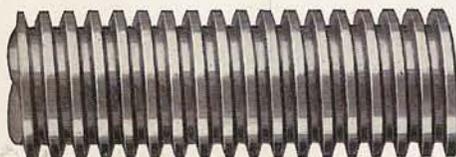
Section of Lead Screw—Actual Diameter Used on the 9-inch Lathe. It is Guaranteed to Meet the Most Exact Requirements in Cutting Accurate Threads
